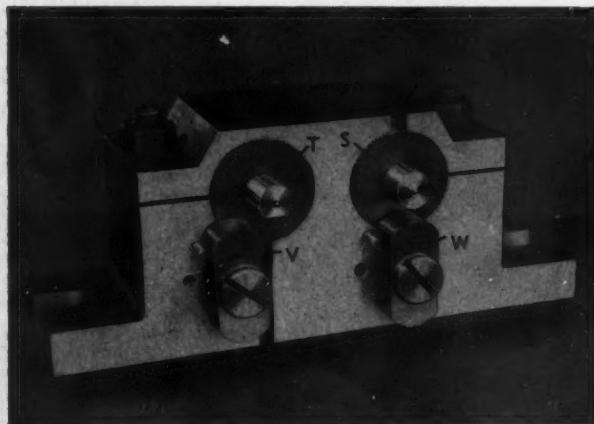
This fixture supports two holders and blanks, while two flats are milled on each piece. A blank is first milled at the right-hand station, and then transferred to the left-hand station, where it is located at 180 deg. to the first setting
